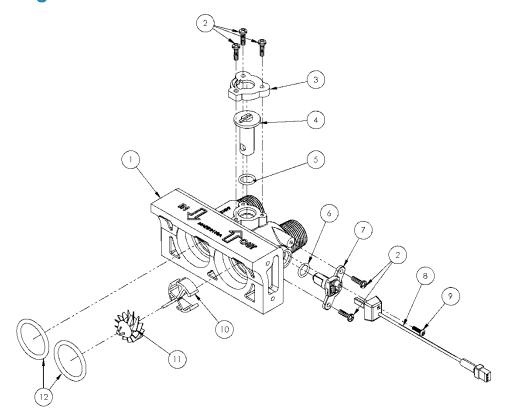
Optional 3/4-inch (19-mm) I/O Adapter Assembly with Blending Valve
